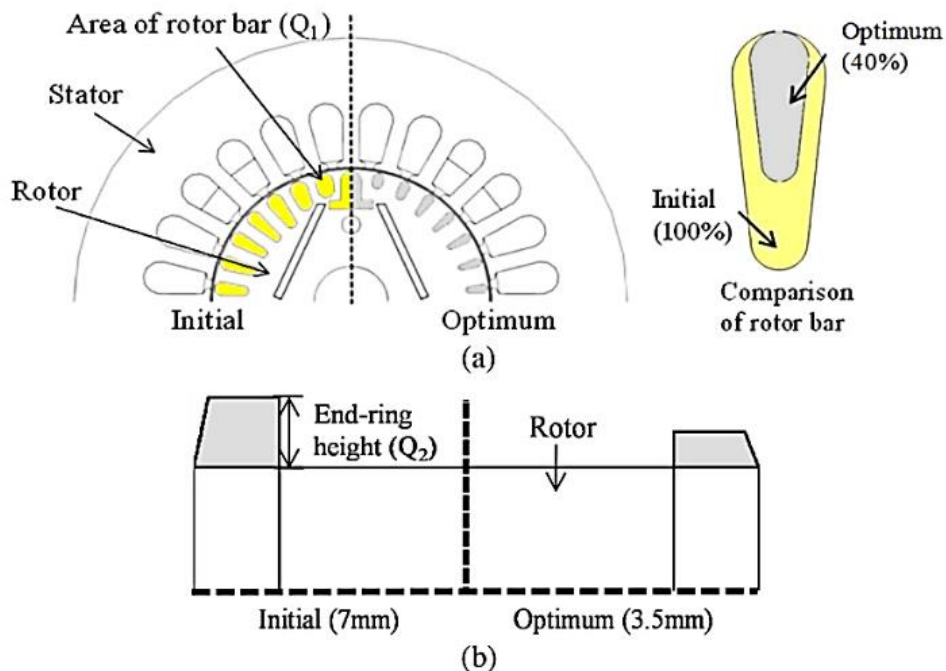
Initial and optimum designs (a) shape, (b) end-ring [63].
